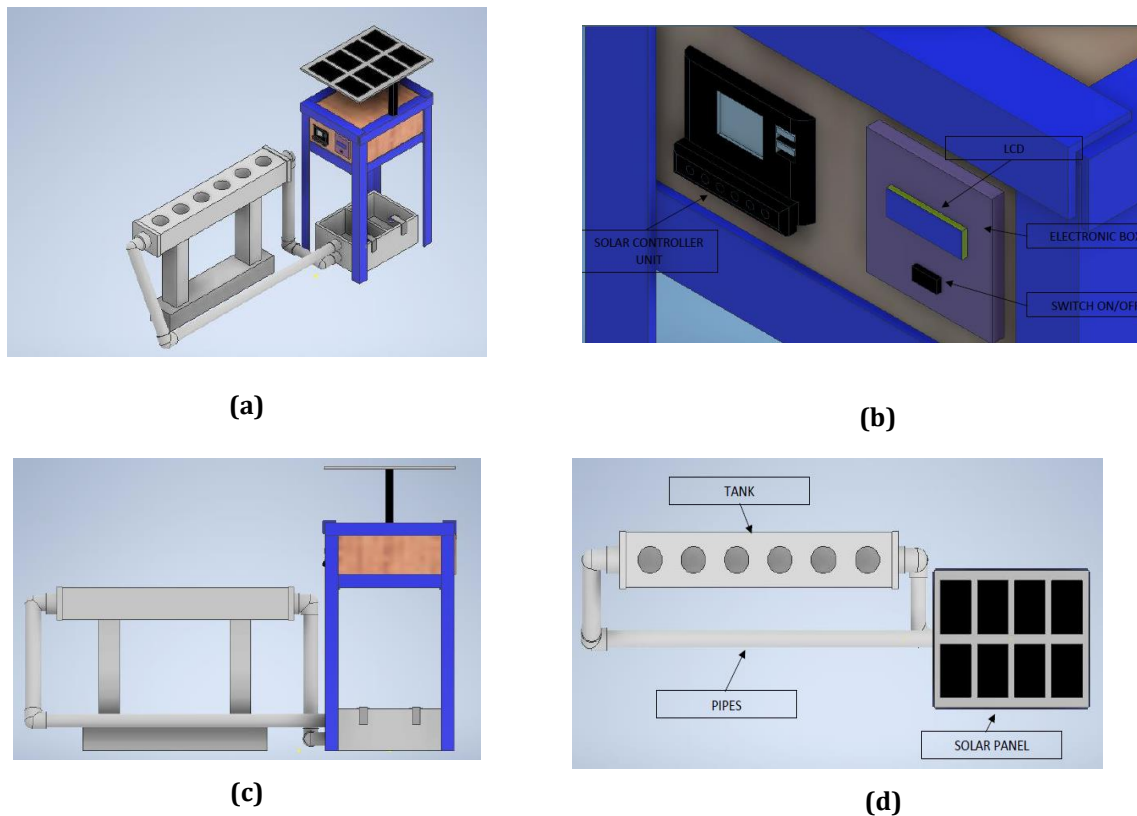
Prototype design (a) actual view (b) close up (c) front view (d) top view
